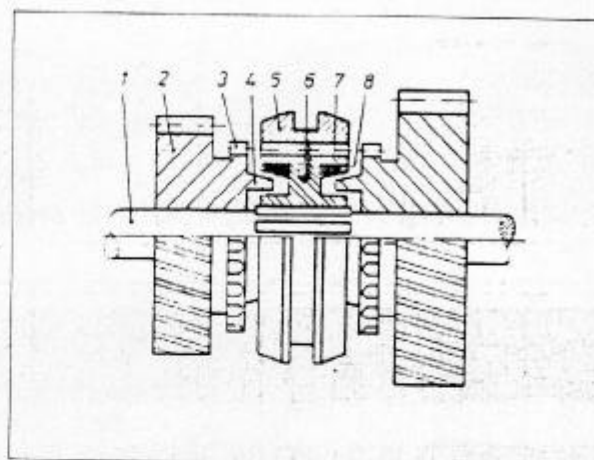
A — 3 SYNCHRONIZED MESH TYPE
